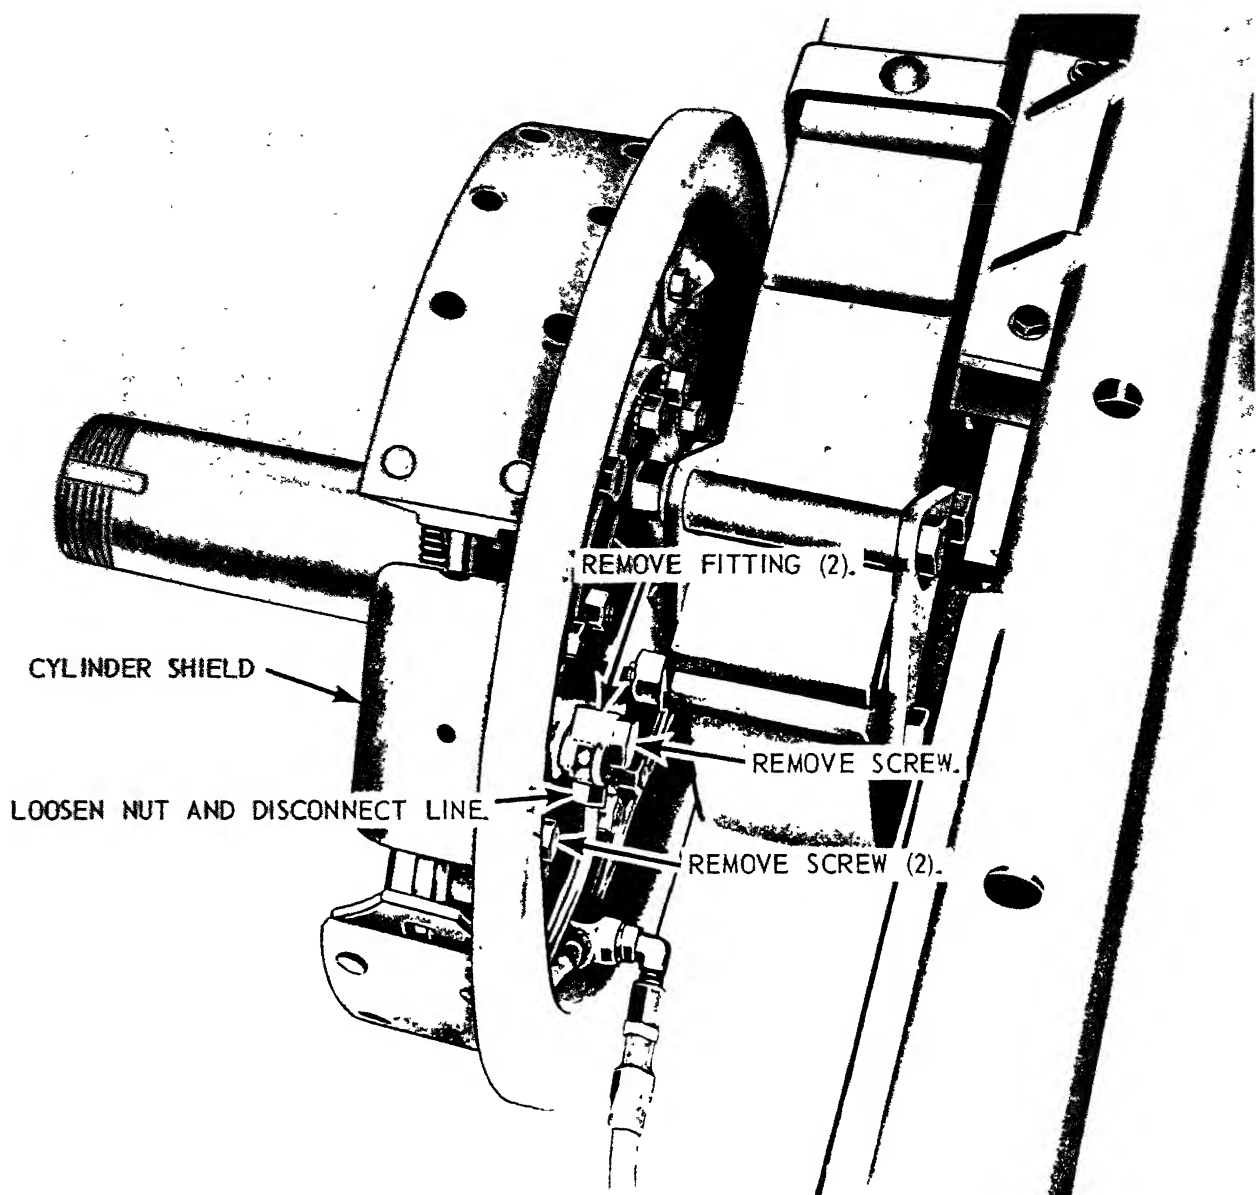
Wheel bearings, grease seals and gaskets, hub, and brake drum assembly.
